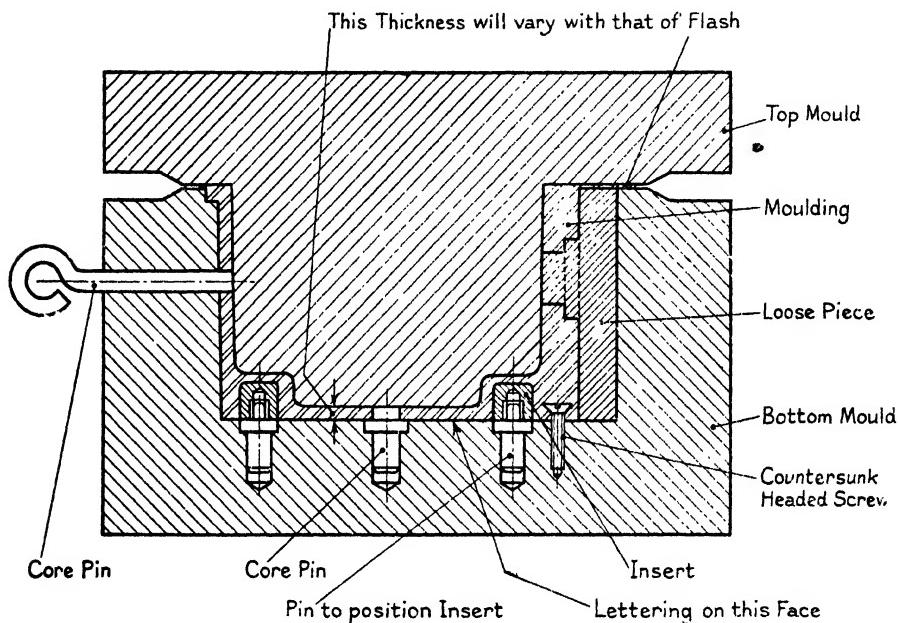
MOULD FOR THERMO-SETTING PLASTICS
